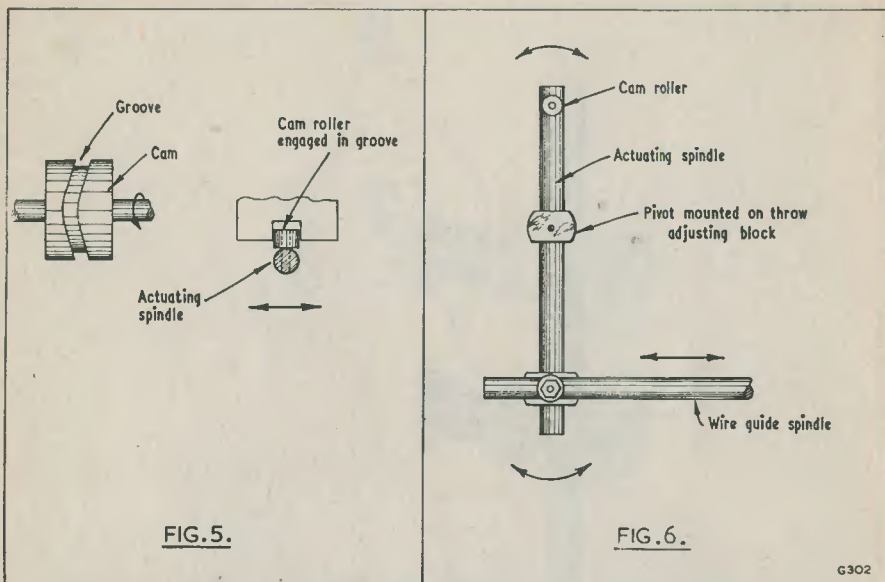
The cam which causes the oscillatory motion of the wire guide spindle. The cam is coupled via a gear train to the head stock holding the coil former
